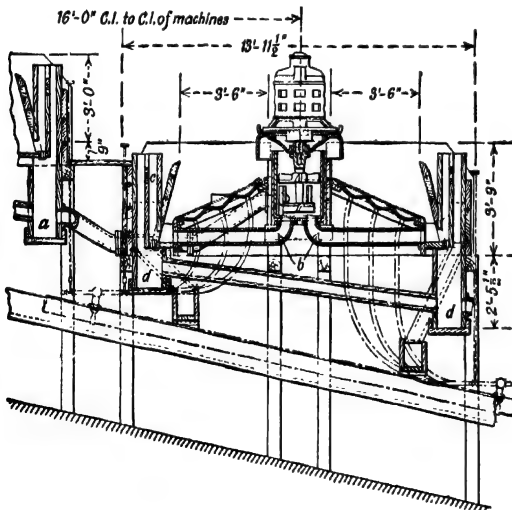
Janney mechanical-air machine. (*After Taggart.*)
